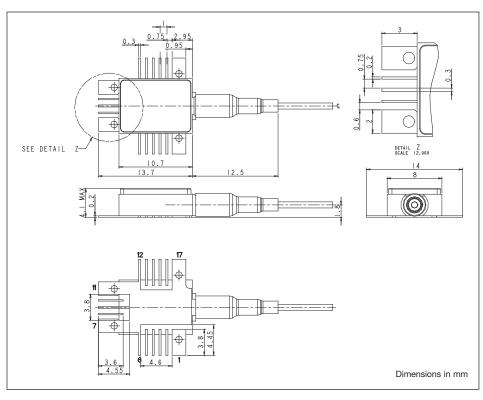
Outline diagram (Illustration only. For full details, refer to appropriate assembly drawing).
